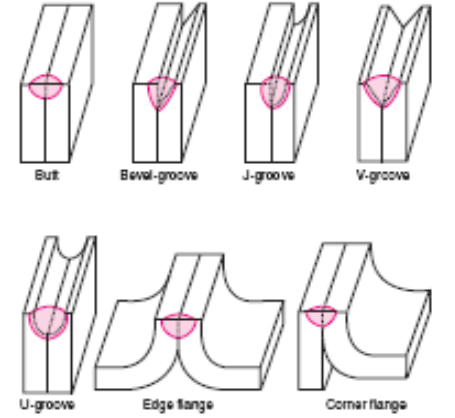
Types of welds that may be made with a basic edge joint.
